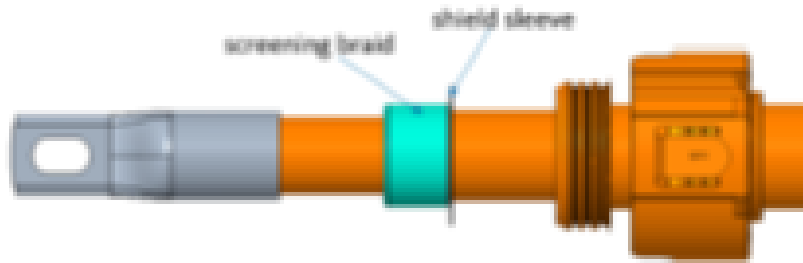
Preview of the cable before the ferrule assembly process – IPT HD connector – 120mm², 150mm²
